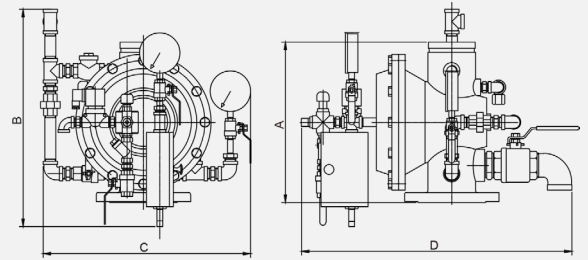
Outline dimensional drawing of deluge valve (Flange connection)
